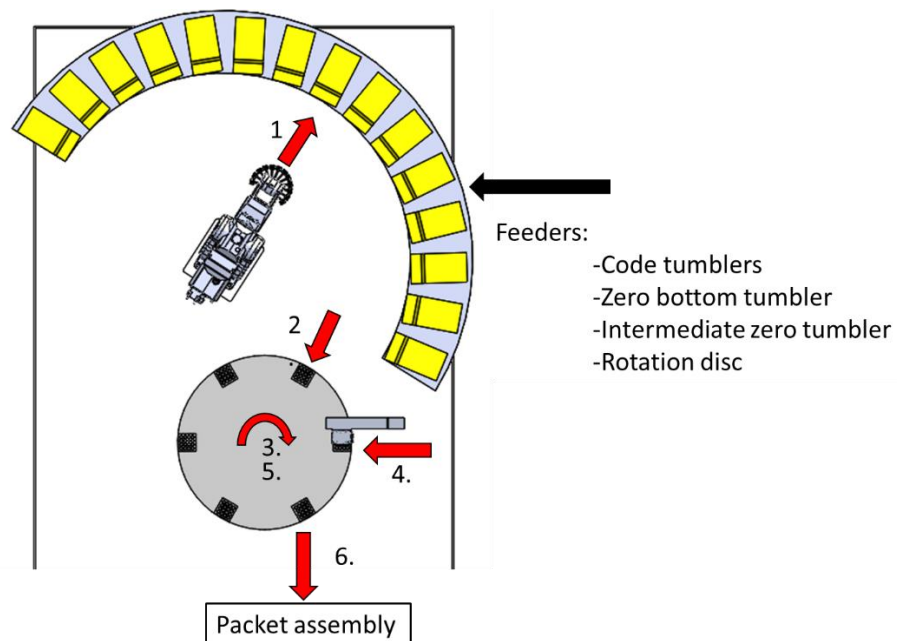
Steps to picking parts from shelves and making them ready for assembly.
